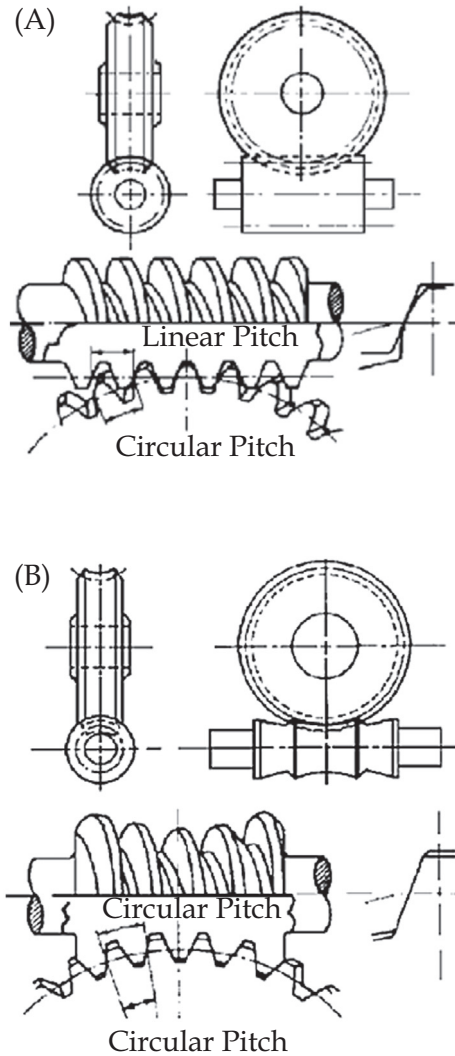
(A) A single-enveloping worm gearing; (B) a double-enveloping worm gearing.
